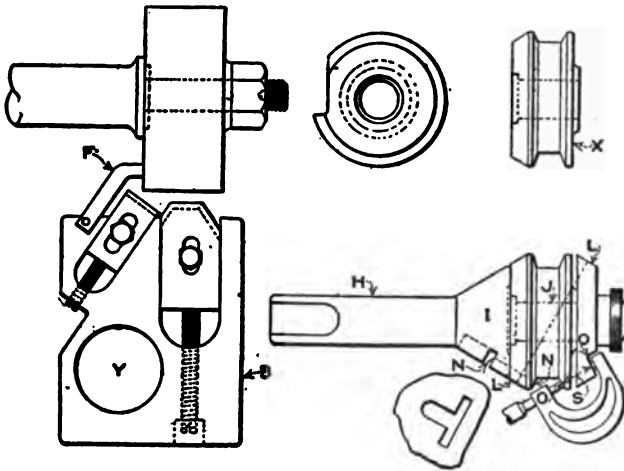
MAKING A CIRCULAR FORMING TOOL
